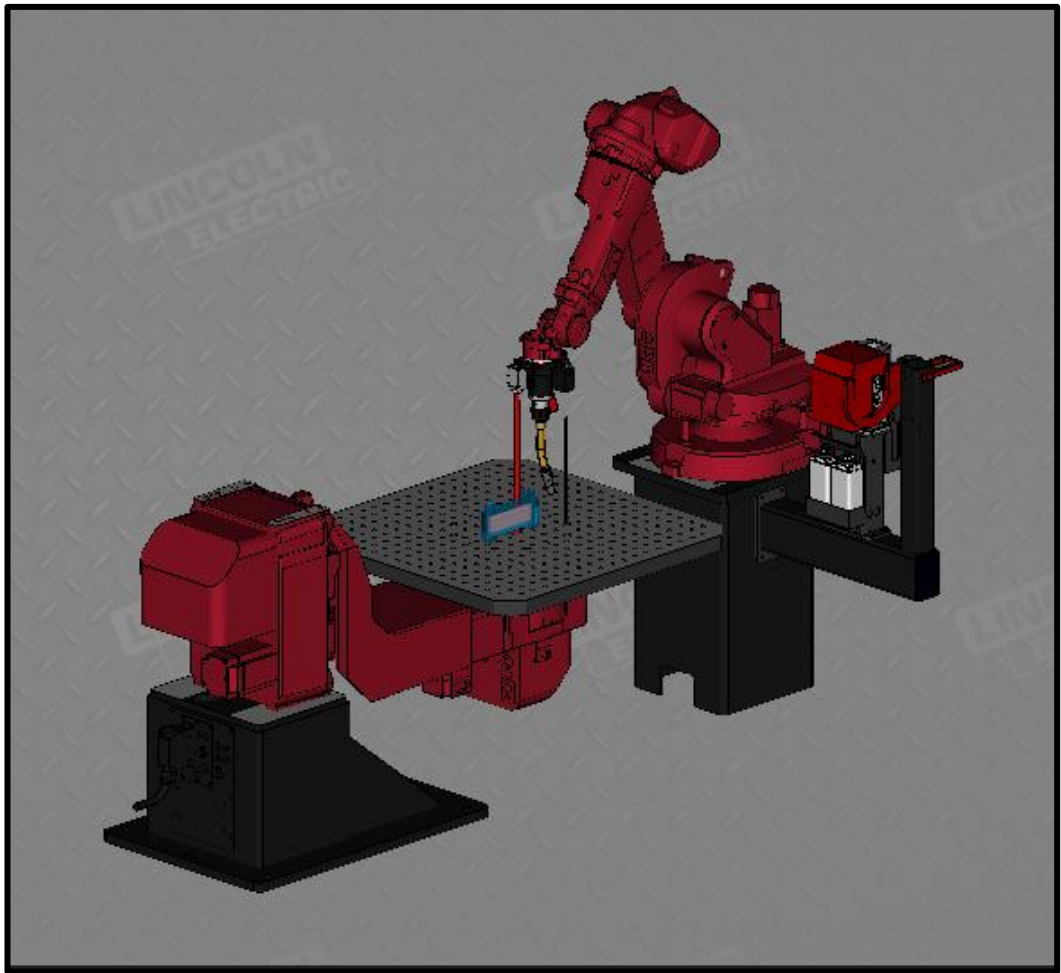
Lincoln Electric's Sculptprint RND Wire Arc Additive Manufacturing Machine
